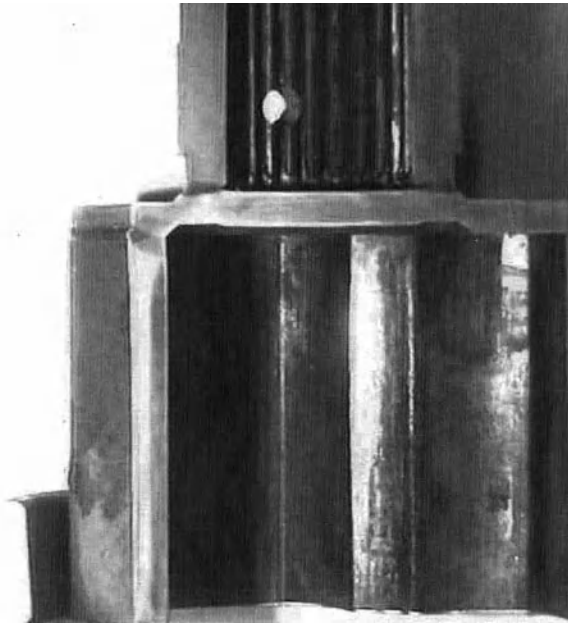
Example of a mass produced laser welded sliding transmission joint
